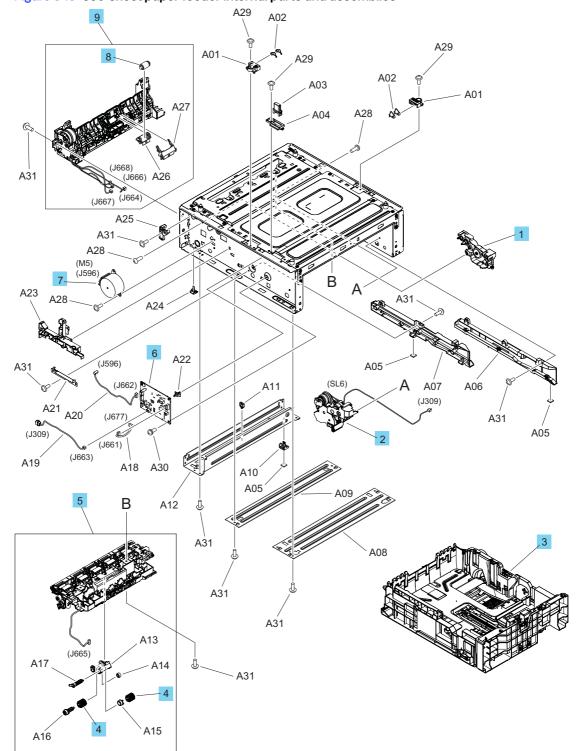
550-sheet paper feeder internal parts and assemblies
